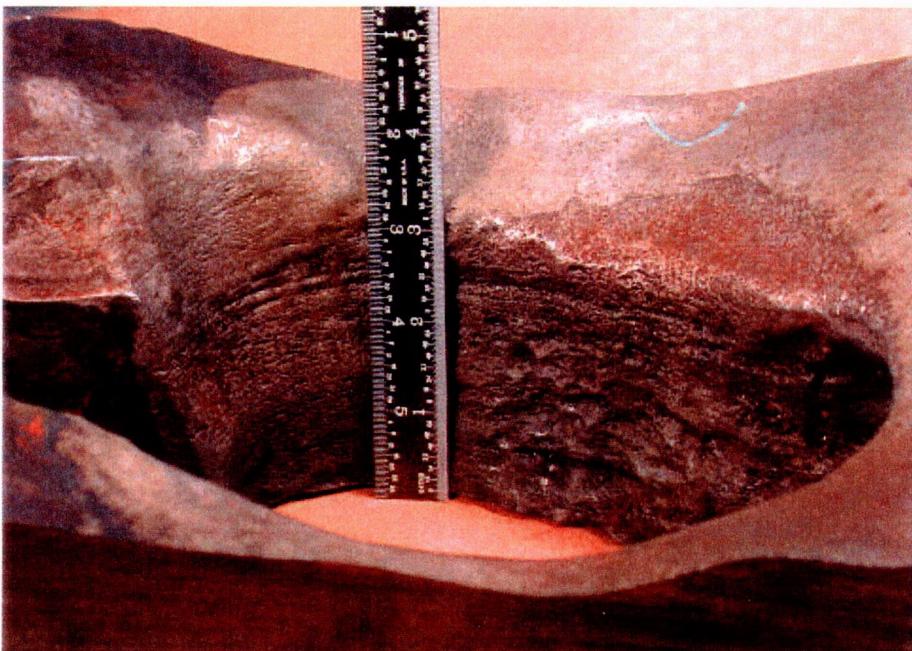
Axial cracks located on J-groove weld bore near 180°. ~0.75X
